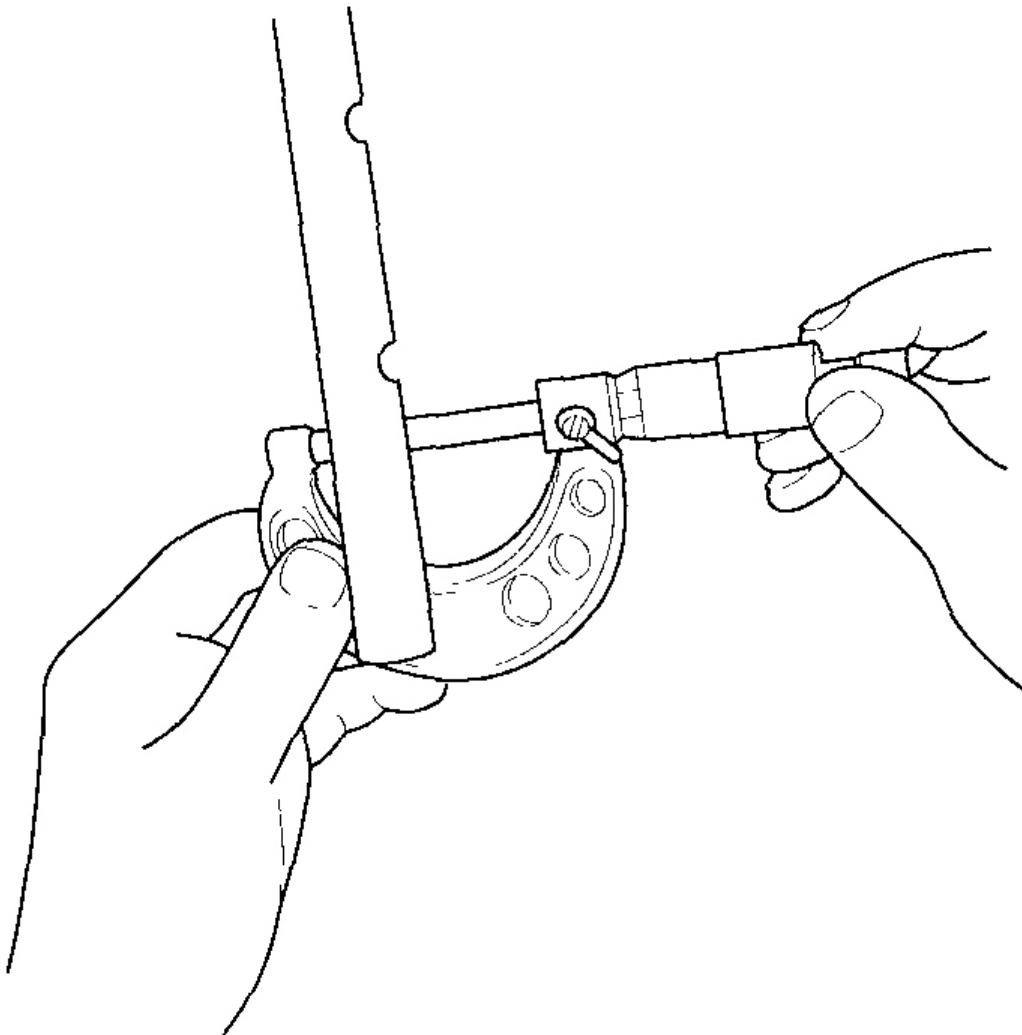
Rocker Arm And Shaft Disassembly/Reassembly
